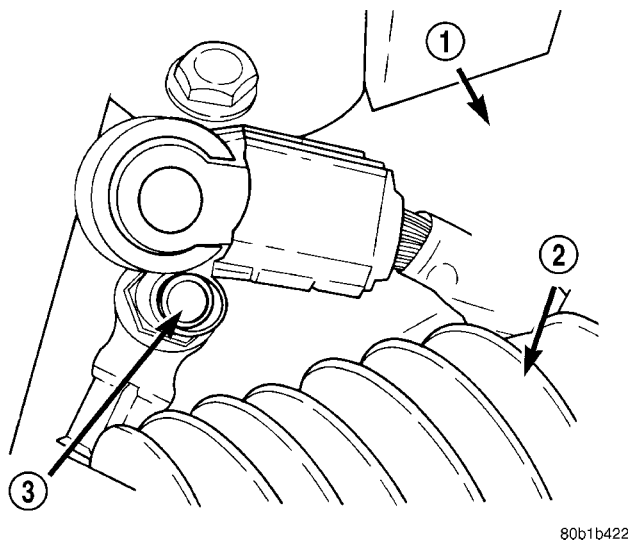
NEGATIVE BATTERY CABLE REMOTE TERMINAL
